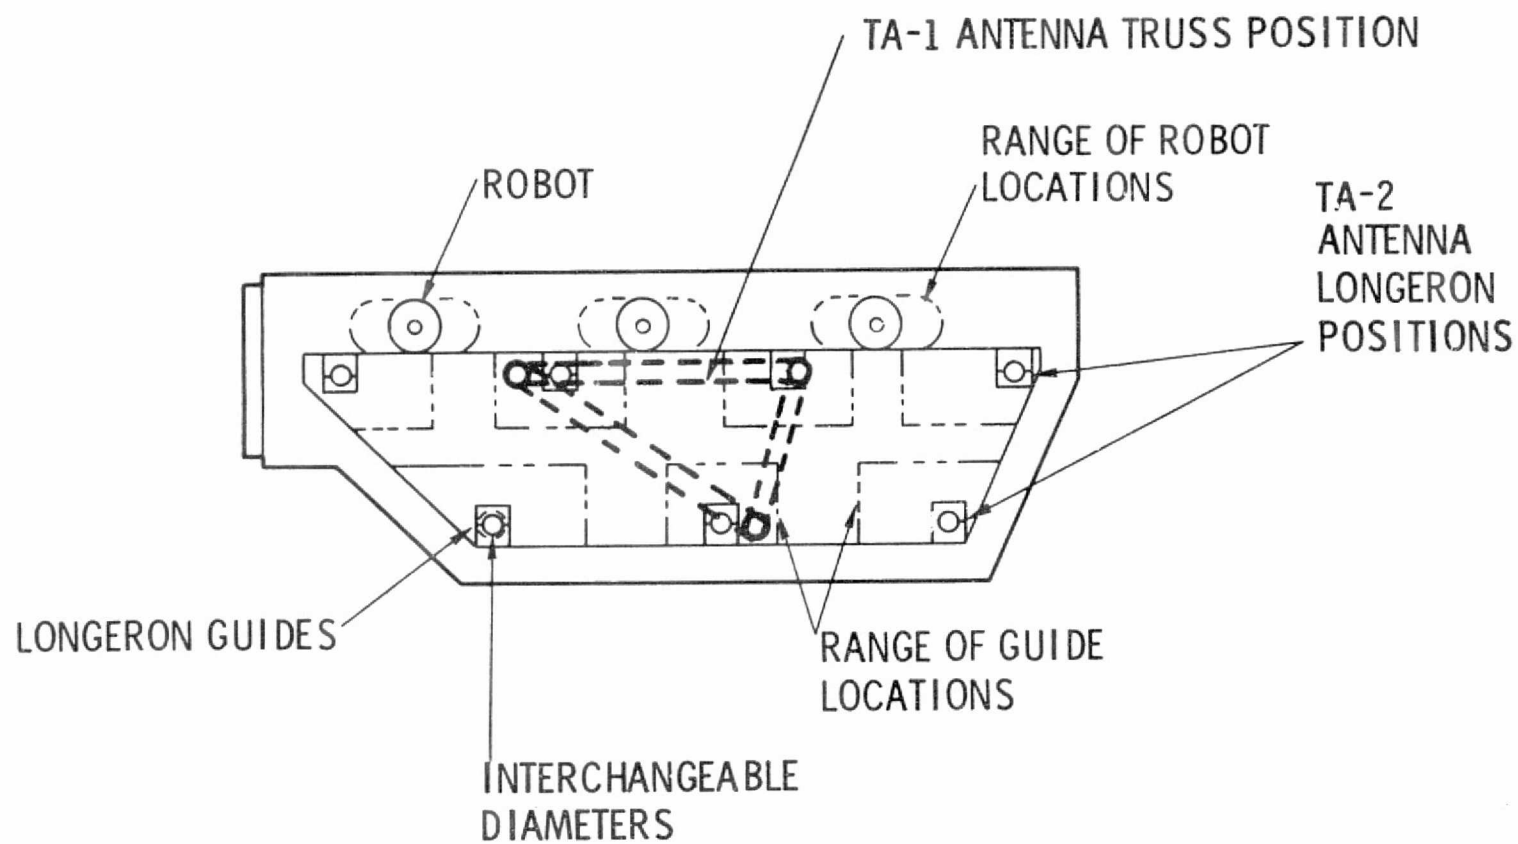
SPS TA-1 Antenna Assembly Fixture
